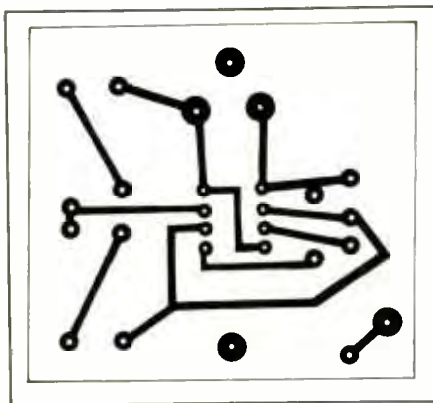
Actual-size etching-and-drilling guide for fabricating a printed-circuit board for the project.
